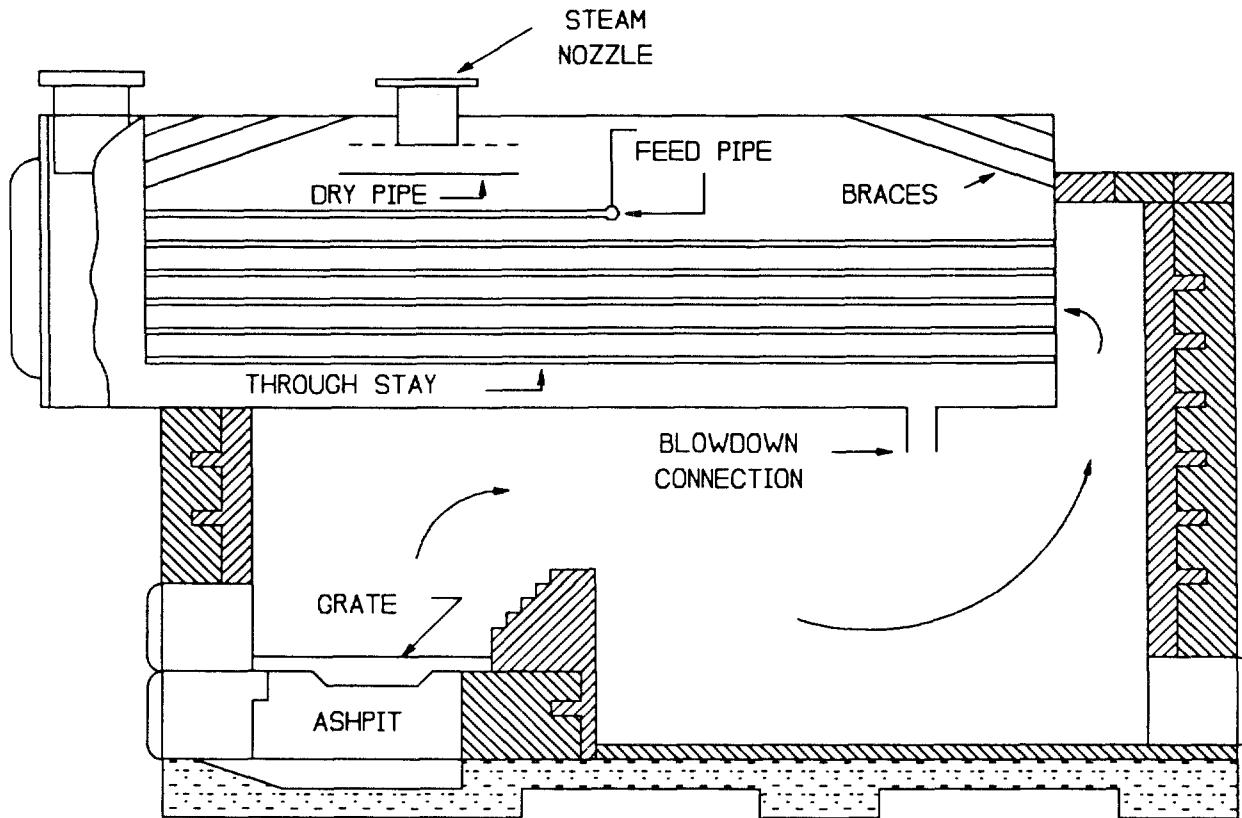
Sectional Sketch of a Horizontal-Return Fire-Tube Boiler
